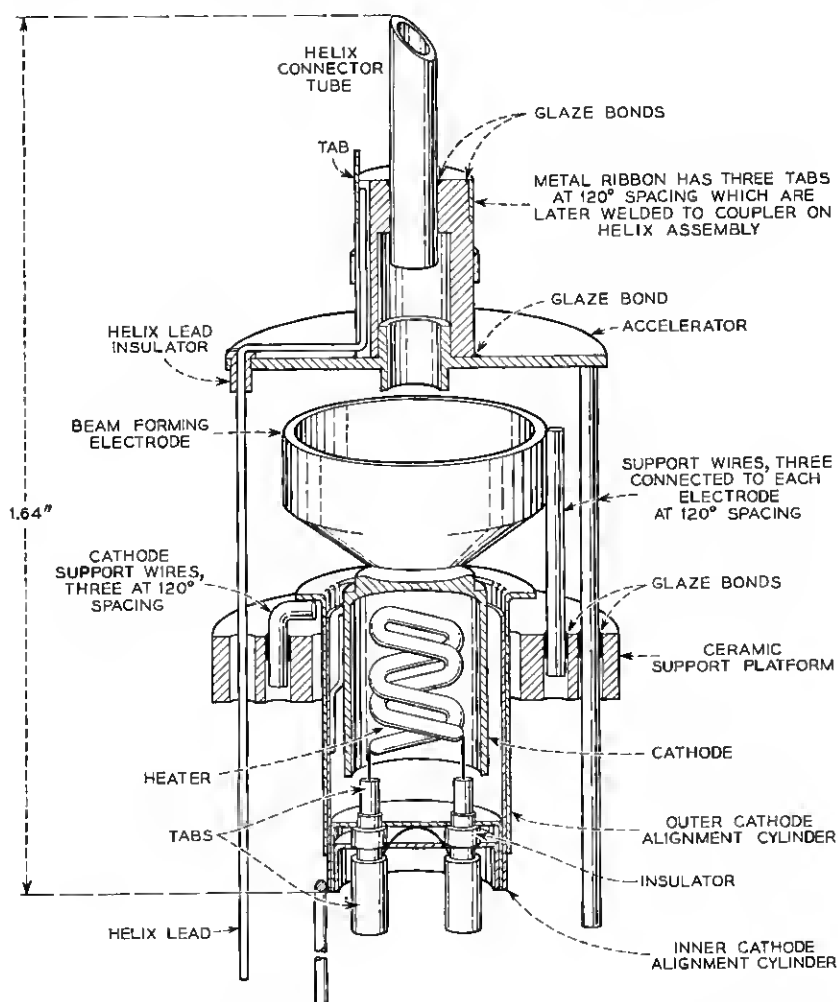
M1789 electron gun assembly. In constructing the gun, all the parts with the exception of the cathode, heater, and inner support cylinder are mounted on a mandrel which fixes their relative positions. Glass powder is applied to the areas where glazed joints are desired. The unit is then heated in forming gas (85%  $N_2$ , 15%  $H_2$ ) to  $1100^\circ C$  to melt the glass and form the glazed bonds. With this technique the precision required for alignment and spacing of the electrodes resides entirely in the tools. The helix connector tube later slides into the coupler detail of Fig. 14 to align gun and helix assemblies. The inner and outer cathode alignment cylinders are welded together at two points at the end remote from the cathode. Optical comparator inspection shows that the significant dimensions of these guns are held to a tolerance of less than  $\pm 2$  mils.
